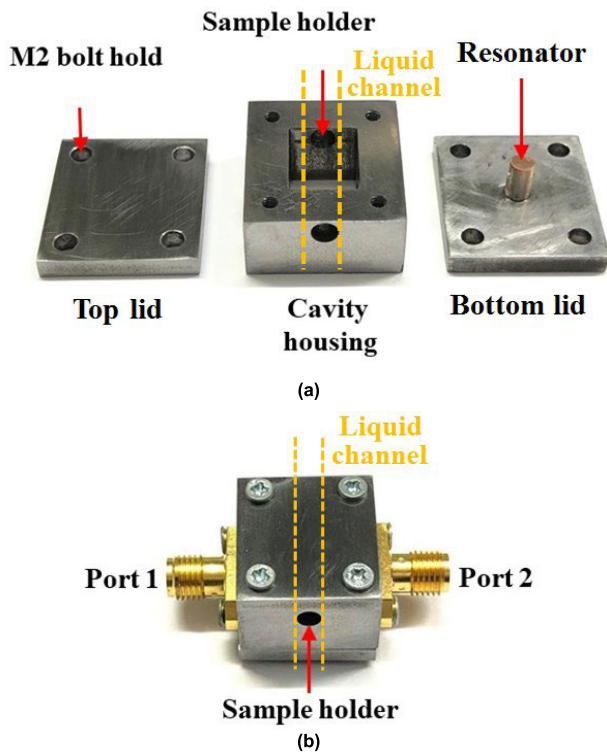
(a) Fabricated NaCl sensor prototype before assembly, which composed of the hollow rectangular housing and its top and bottom steel lids. (b) Assembled NaCl sensor prototype without Teflon tube.
